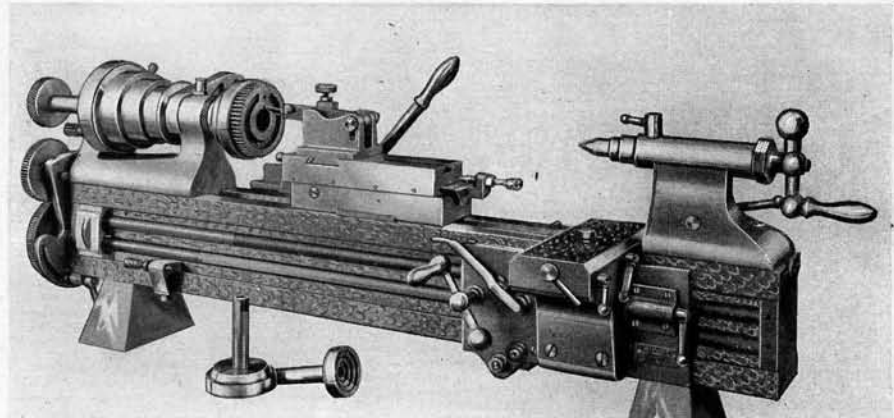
a. Showing Rivett Thread Tool on lathe. There is a special bulletin describing the Rivett Thread Tool.
